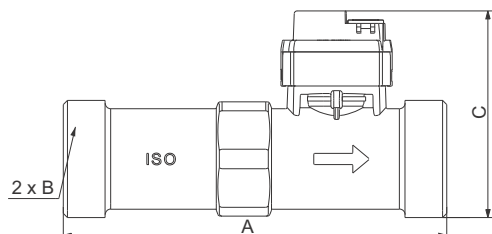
Dimensions, MFS QT 20-200 l/min, with threads
